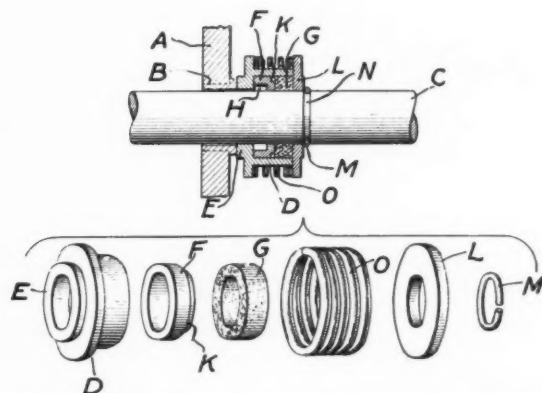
This fluid seal for running shafts requires minimum machining for installation
